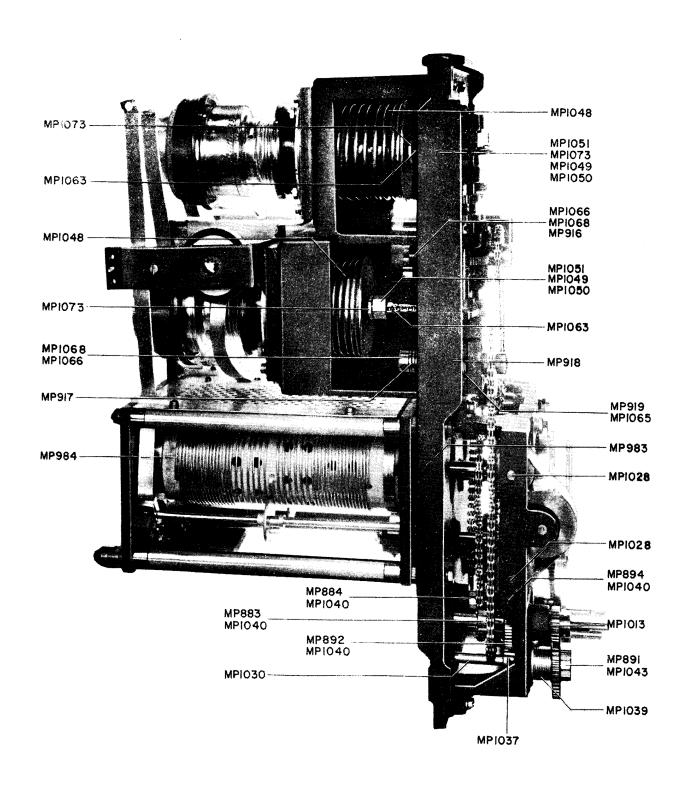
Tuning and Coupling Mechanism, Locati n f Parts n Lefthand Side
